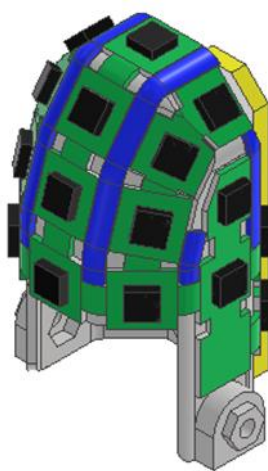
CAD design of Flexible PCB wrapped around homogenous shell
